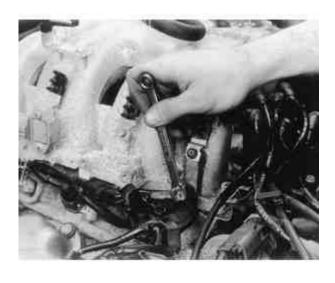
Using a hex-type socket, remove the intake manifold collector mounting bolts
